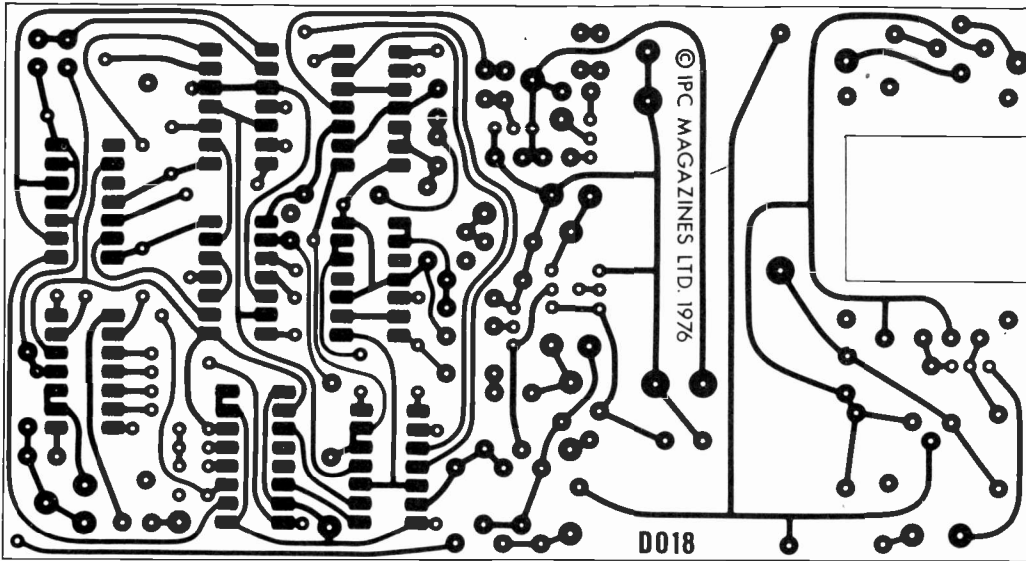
(b): Main printed board, underside track pattern, shown full size.
